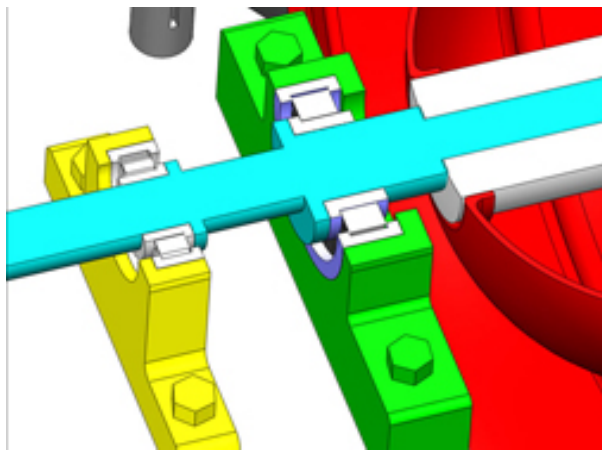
SolidWorks cutout of bearings and drivetrain
